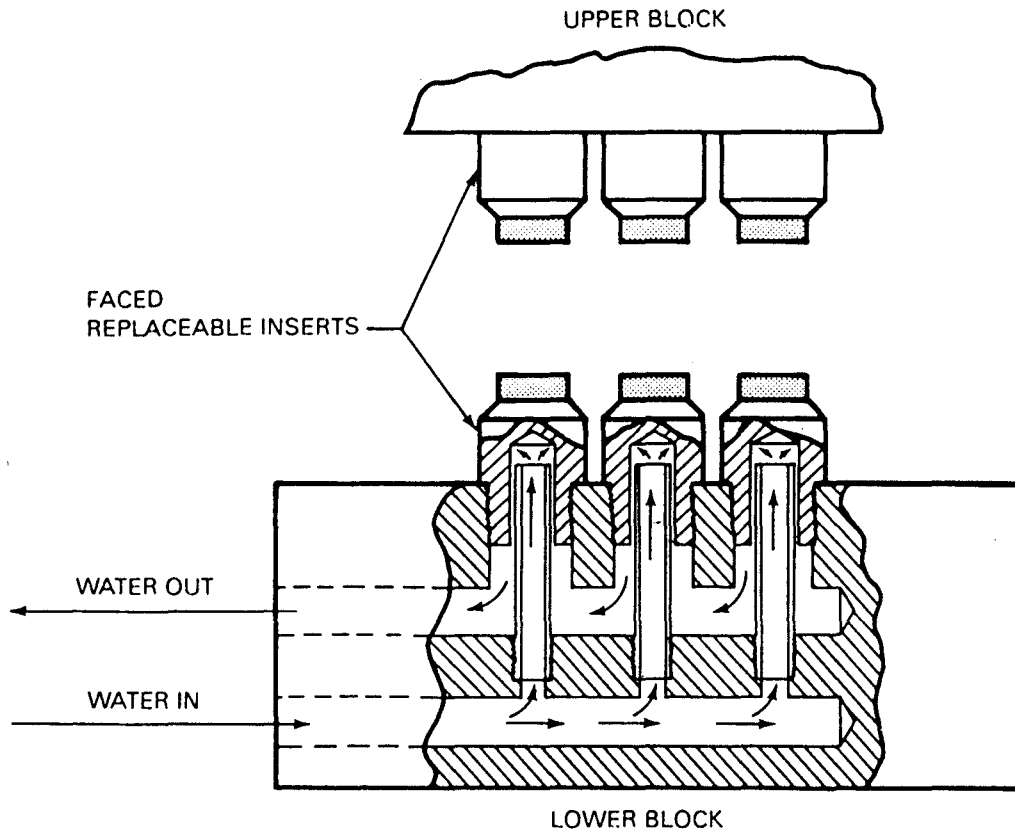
Typical Projection Welding Multiple Electrode Construction
